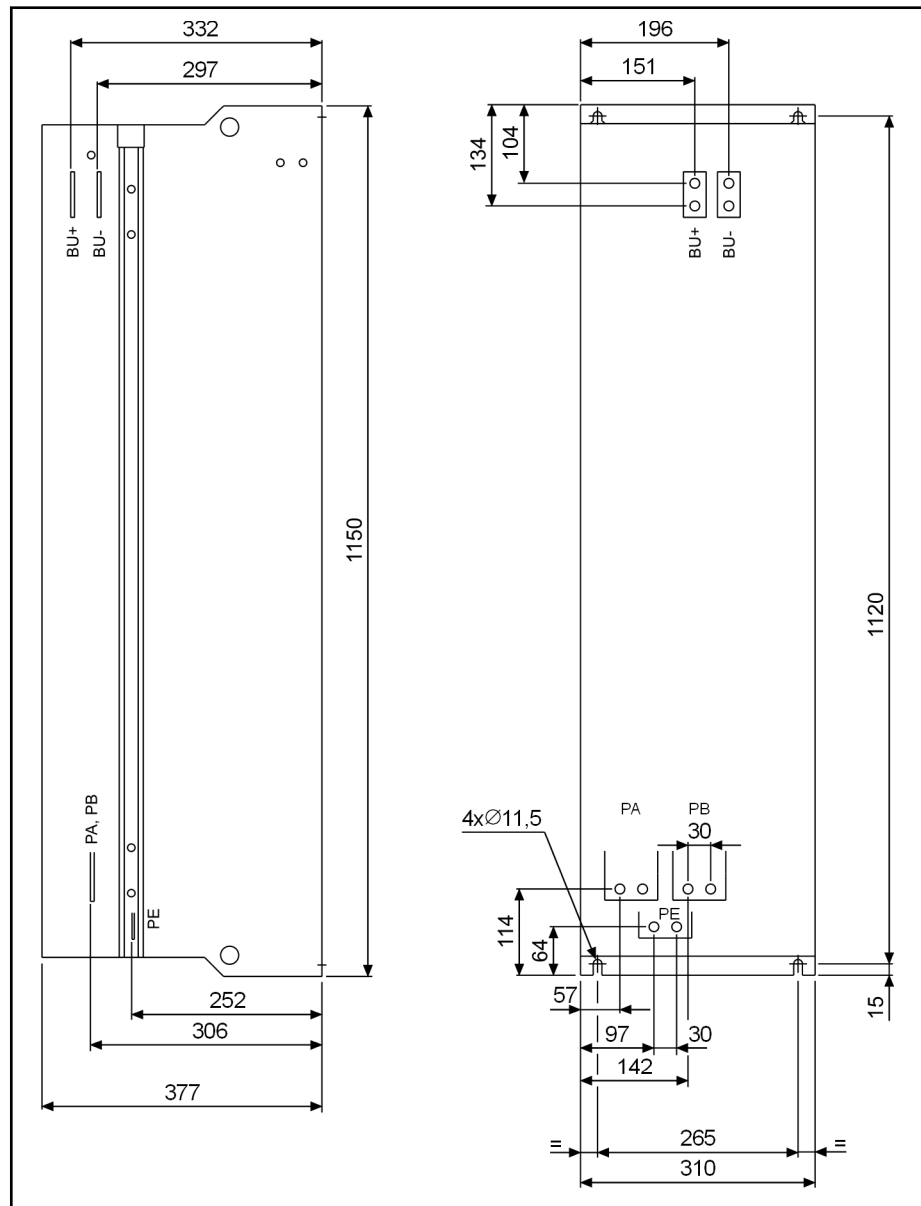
Dimensions Braking Unit HLT01.1A -400K
